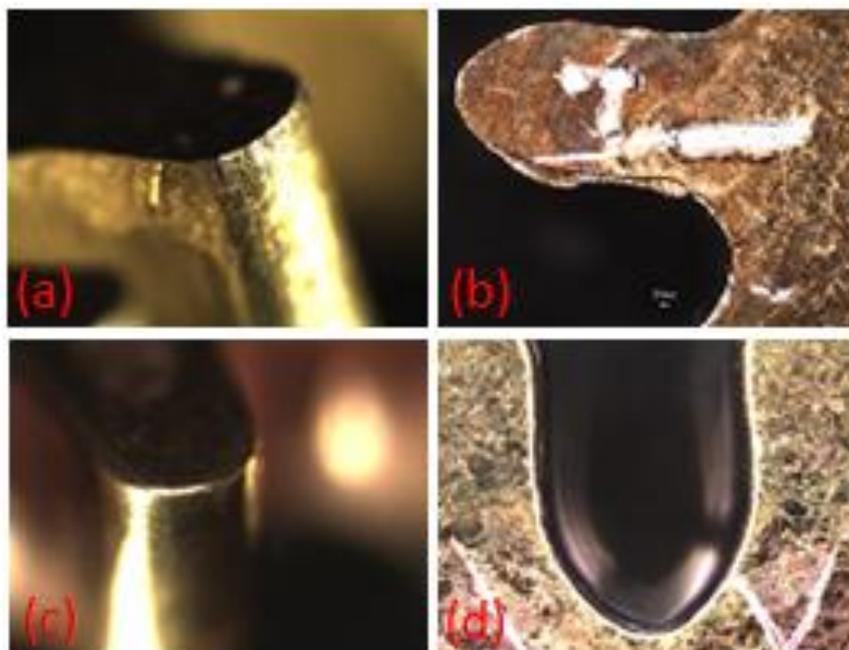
(a) and (b) gear tooth before deburring; (c) and (d) gear tooth after deburring. (Magnification : 10x10)
